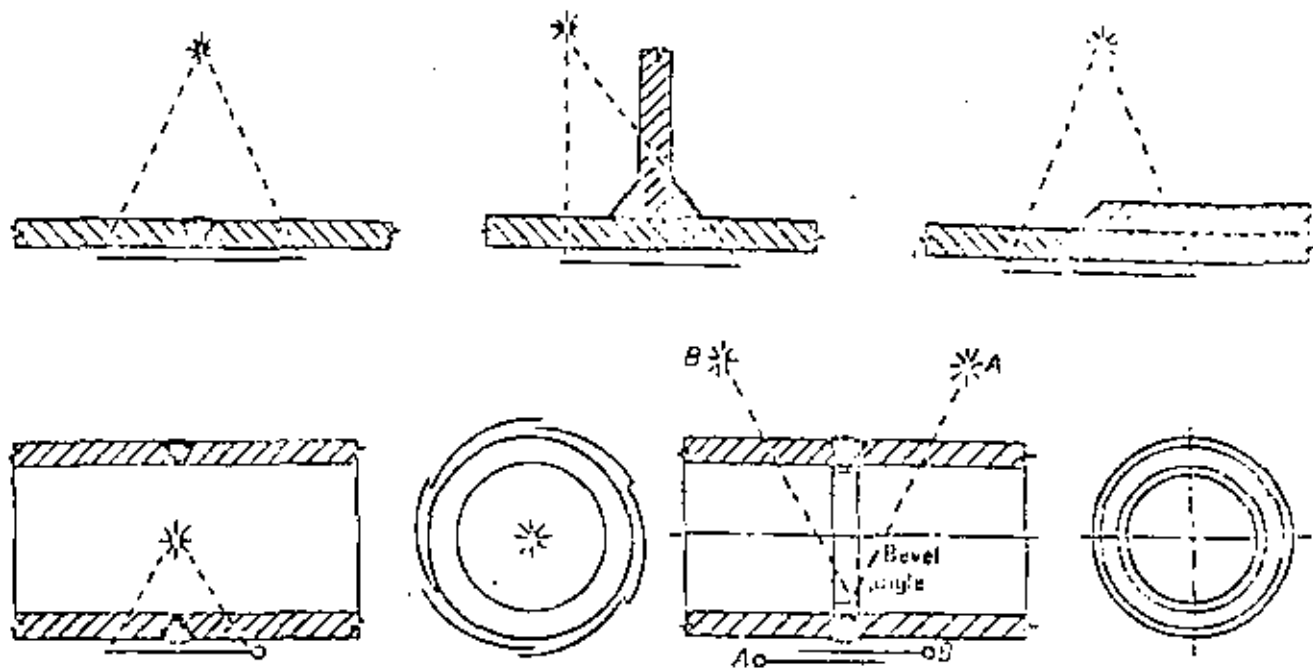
Typical arrangements of X-ray source and film in radiography of welds. The angle of exposure and the geometry of the weld influence interpretation of the negative. Note that multiple exposure may be necessary for pipe welds. Of the several welds shown above, fillet welds are the most difficult to x-ray and the most difficult to interpret.
